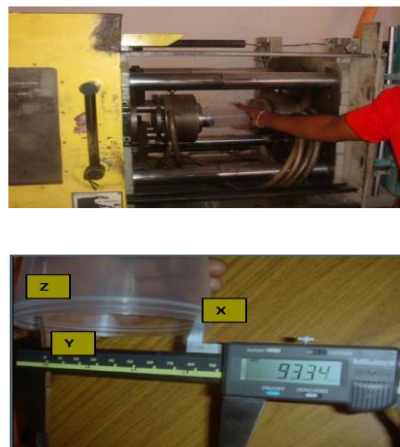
(a) Plastic Injection Molding Machine (100-ton capacity). (b) Dimensions of Plastic Jar through Digital Caliper.
